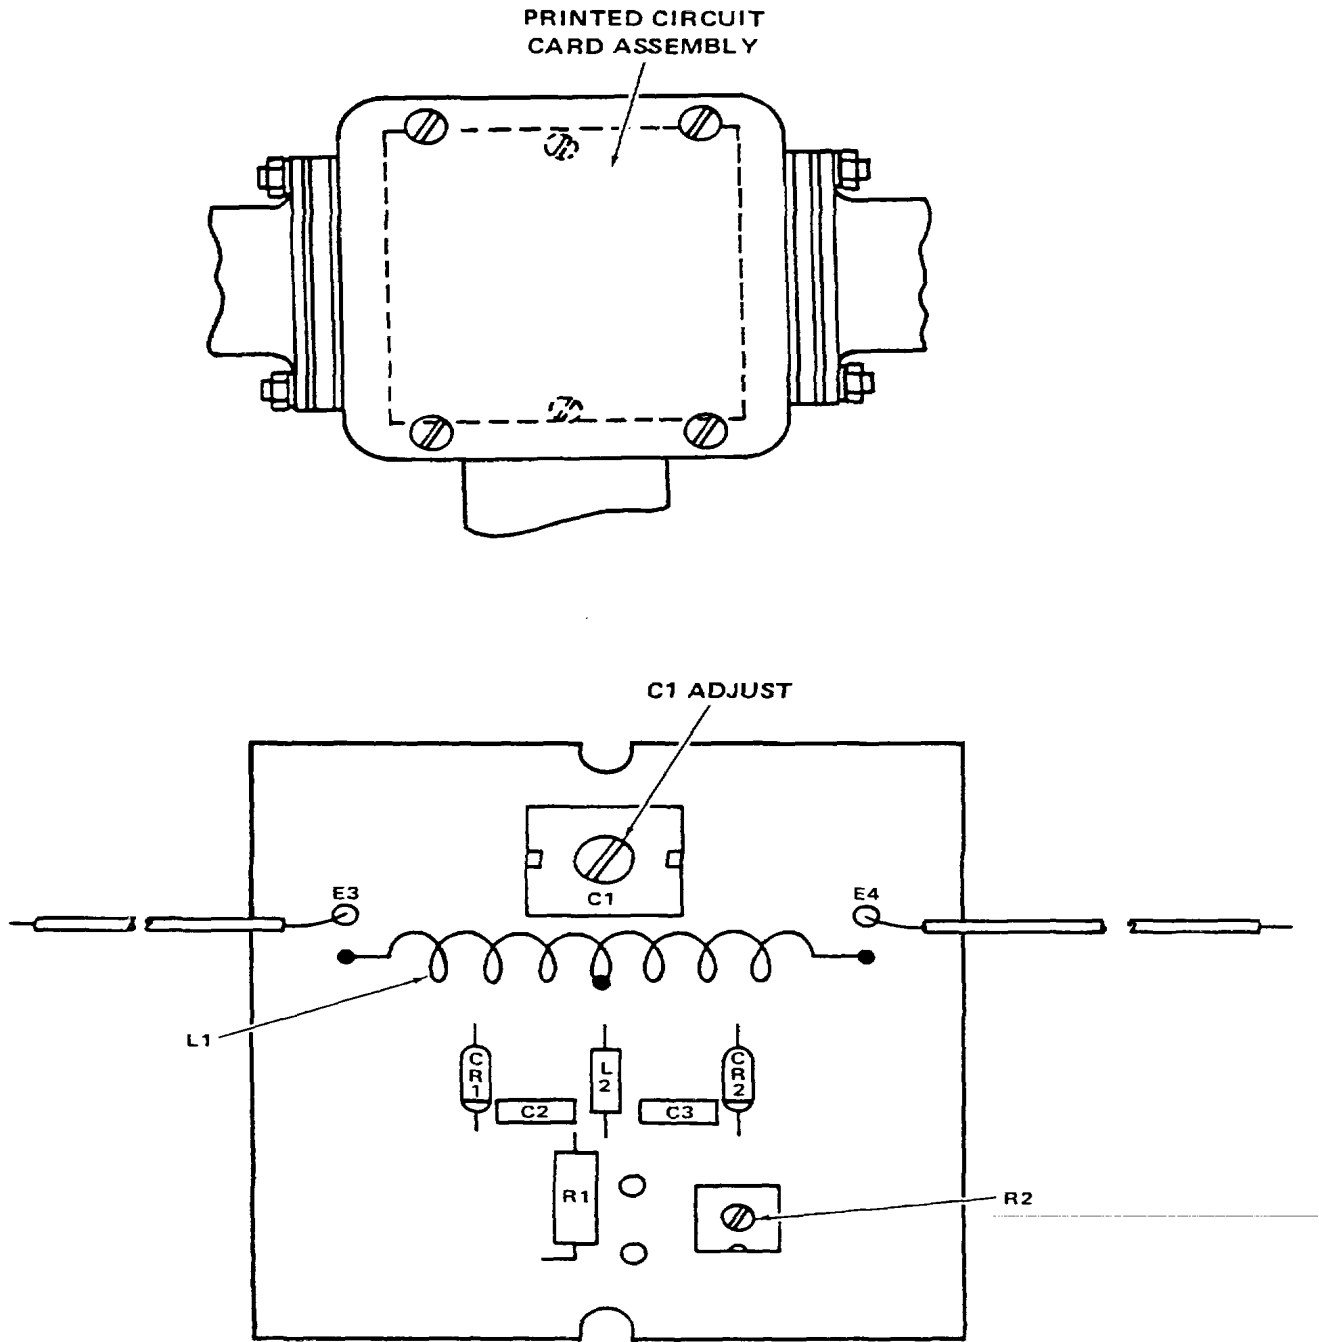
Field Detector, 2A1 Circuit Card Assembly Component Location
